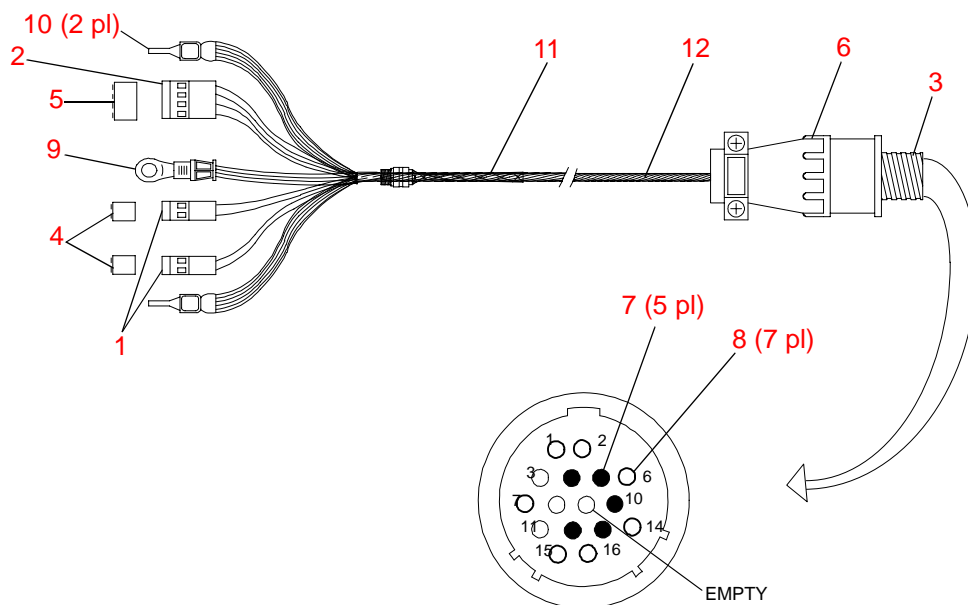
VL6 Input W/Grn-Yel Cable Assembly
